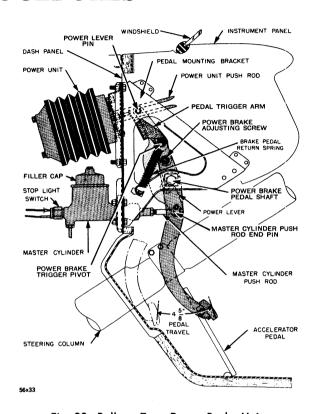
Bellows Type Power Brake Unit and Linkage Installation
